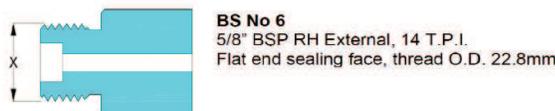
BS 341 British Standard Cylinder Valve Outlets and Connections
